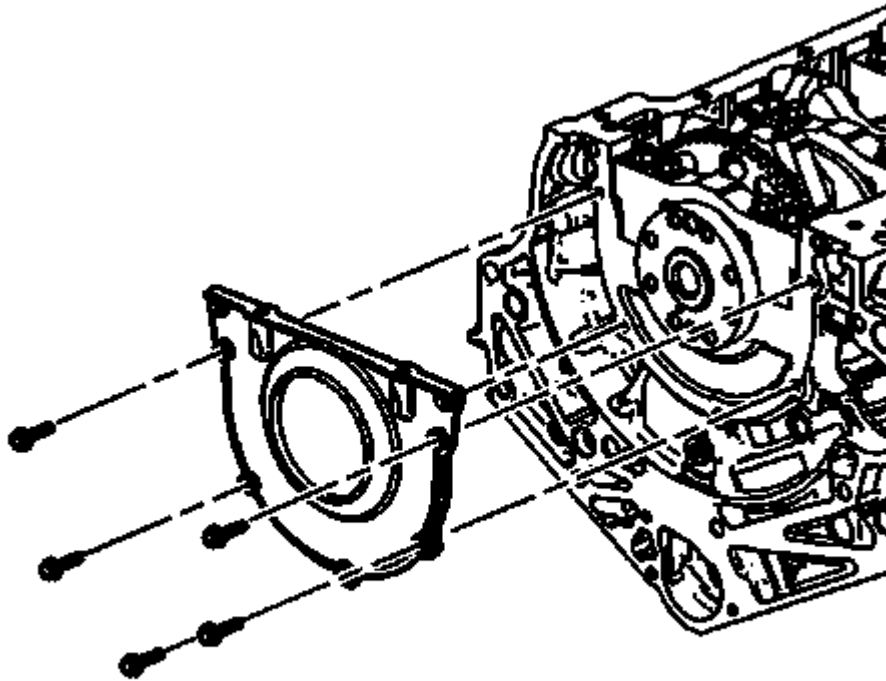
View Of Crankshaft Rear Oil Seal & Housing
